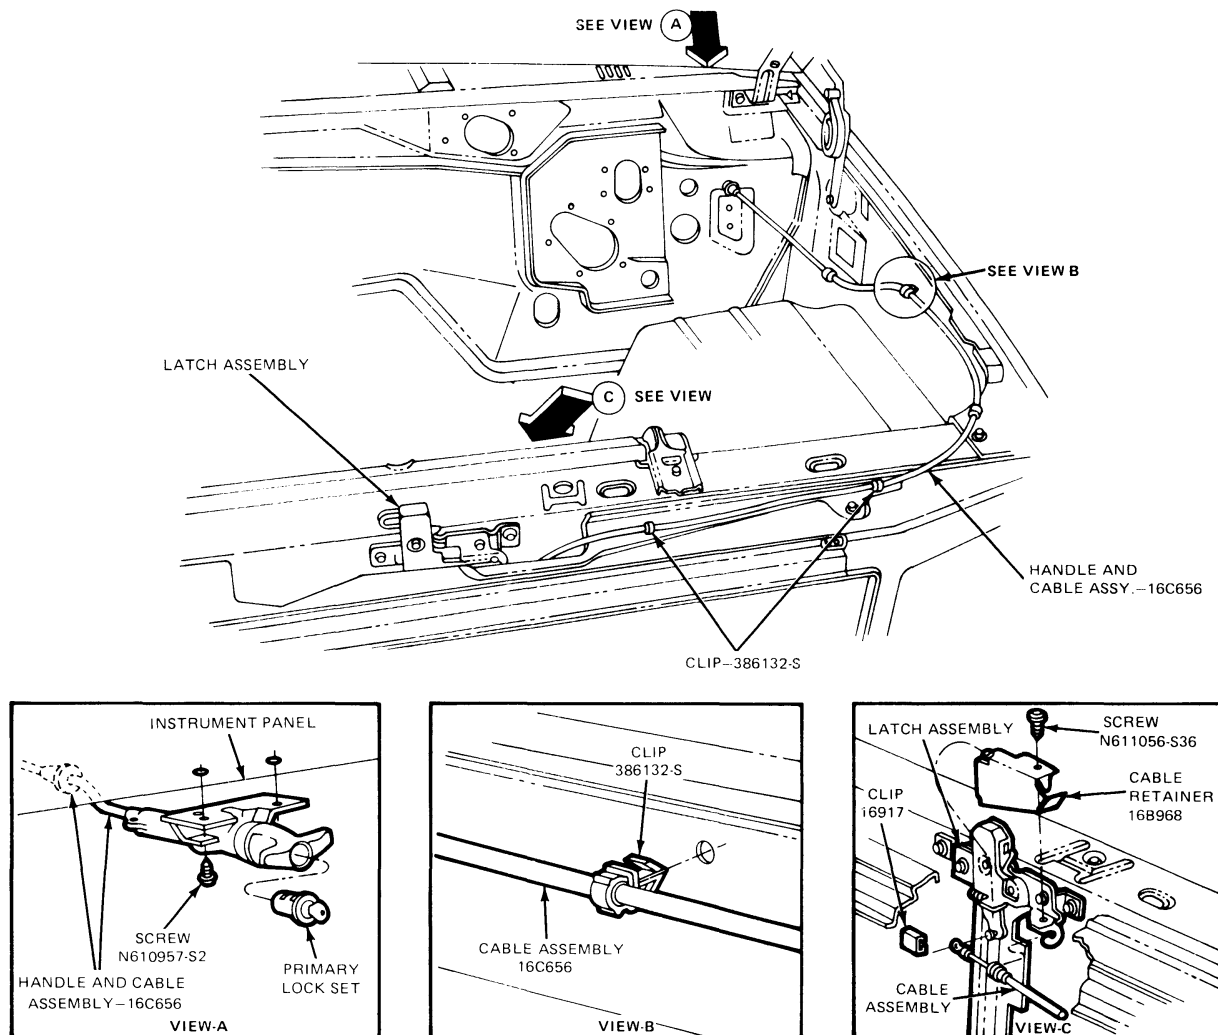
Hood Latch Remote Control Cable and Lock—F-100—F-350 and Bronco
